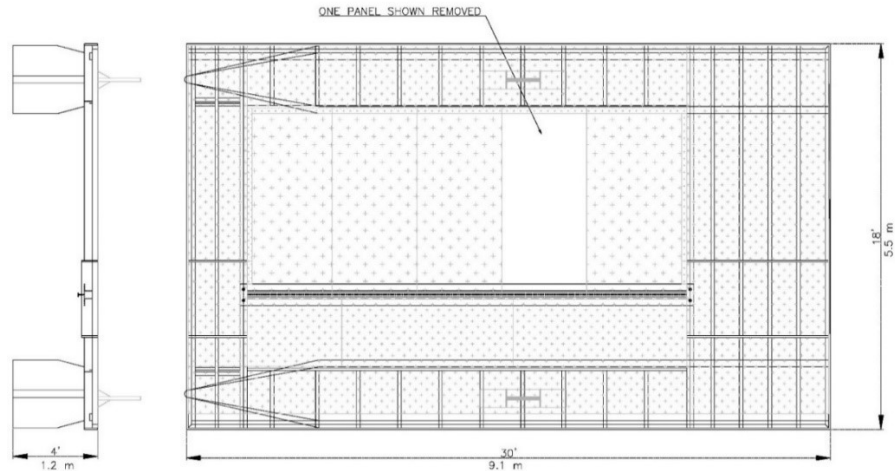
Test platform plan view and end view and dimensions. One of five removable panels shown removed. Pivot brackets for 25-kW unit shown on either side, near center and in grey on the end view. Longitudinal beam just off center is where the vessel's width was extended to accommodate 25-kW and larger rotors.
